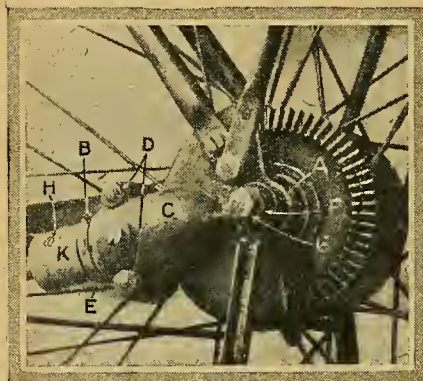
The bevel drive, wrongly alleged to be mysterious.
